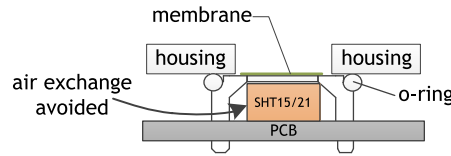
Mounting schematics of the filter cap protection for the SHT15 and SHT21S sensors.
